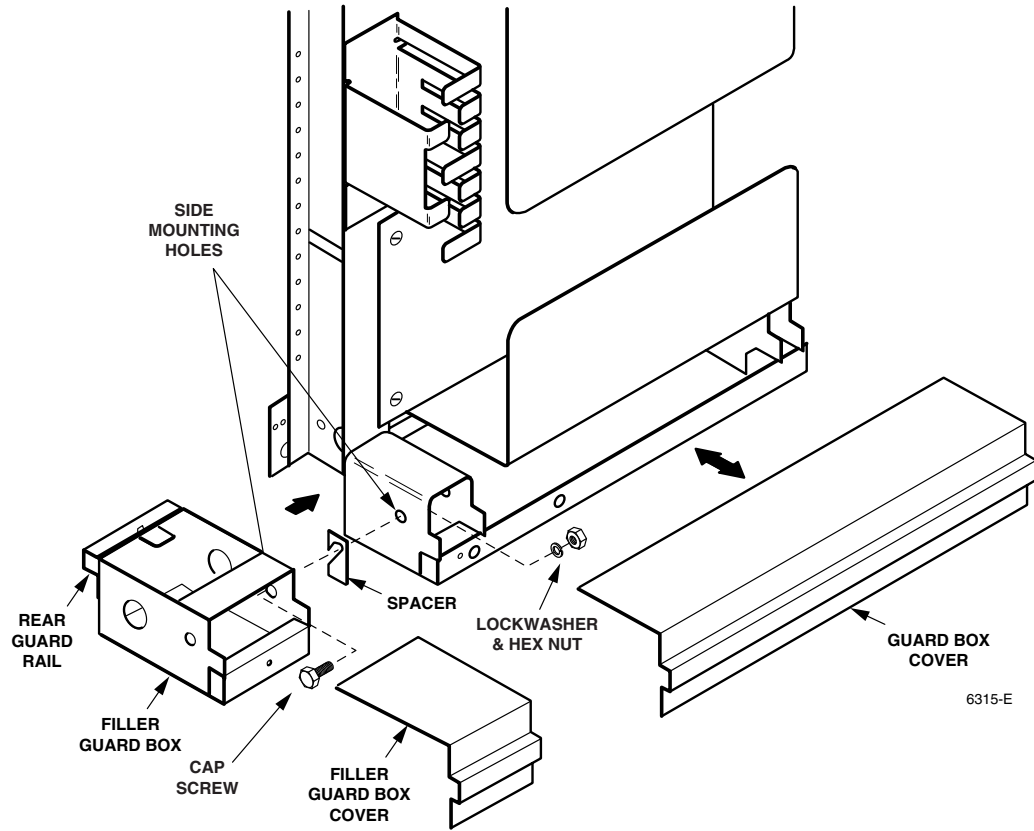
Filler Guard Box Installation (4-Inch Guard Box Shown)
